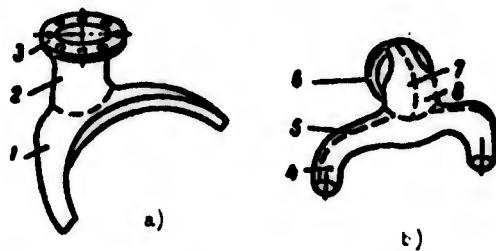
Pipelines of complex form: 1 - shaped collector; 2 - pipe; 3, 6 - flanges; 4, 5 - ladles of pipelines; 7, 8 - halves of the pipe.
